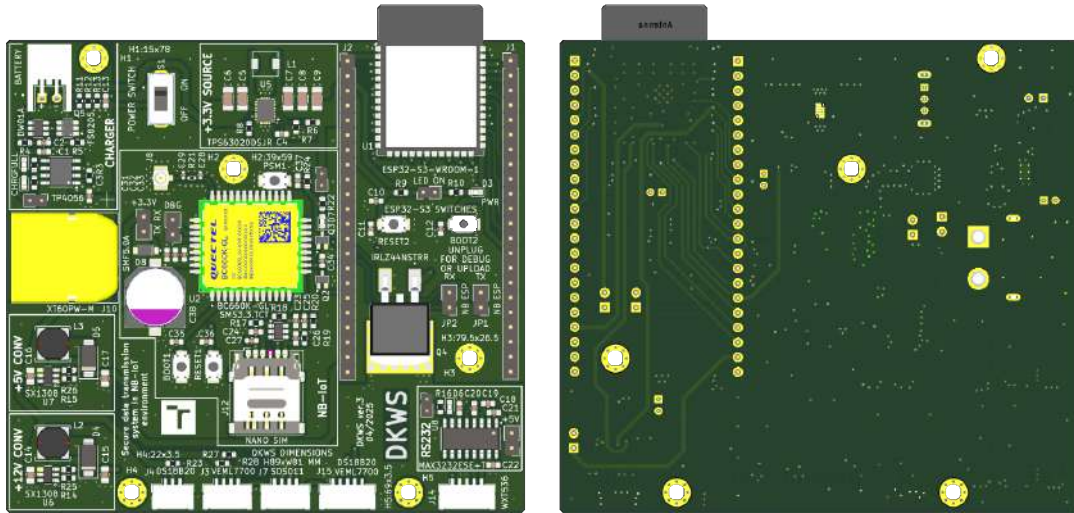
DKWS PCB (89x81mm) designed by the prototype board.
